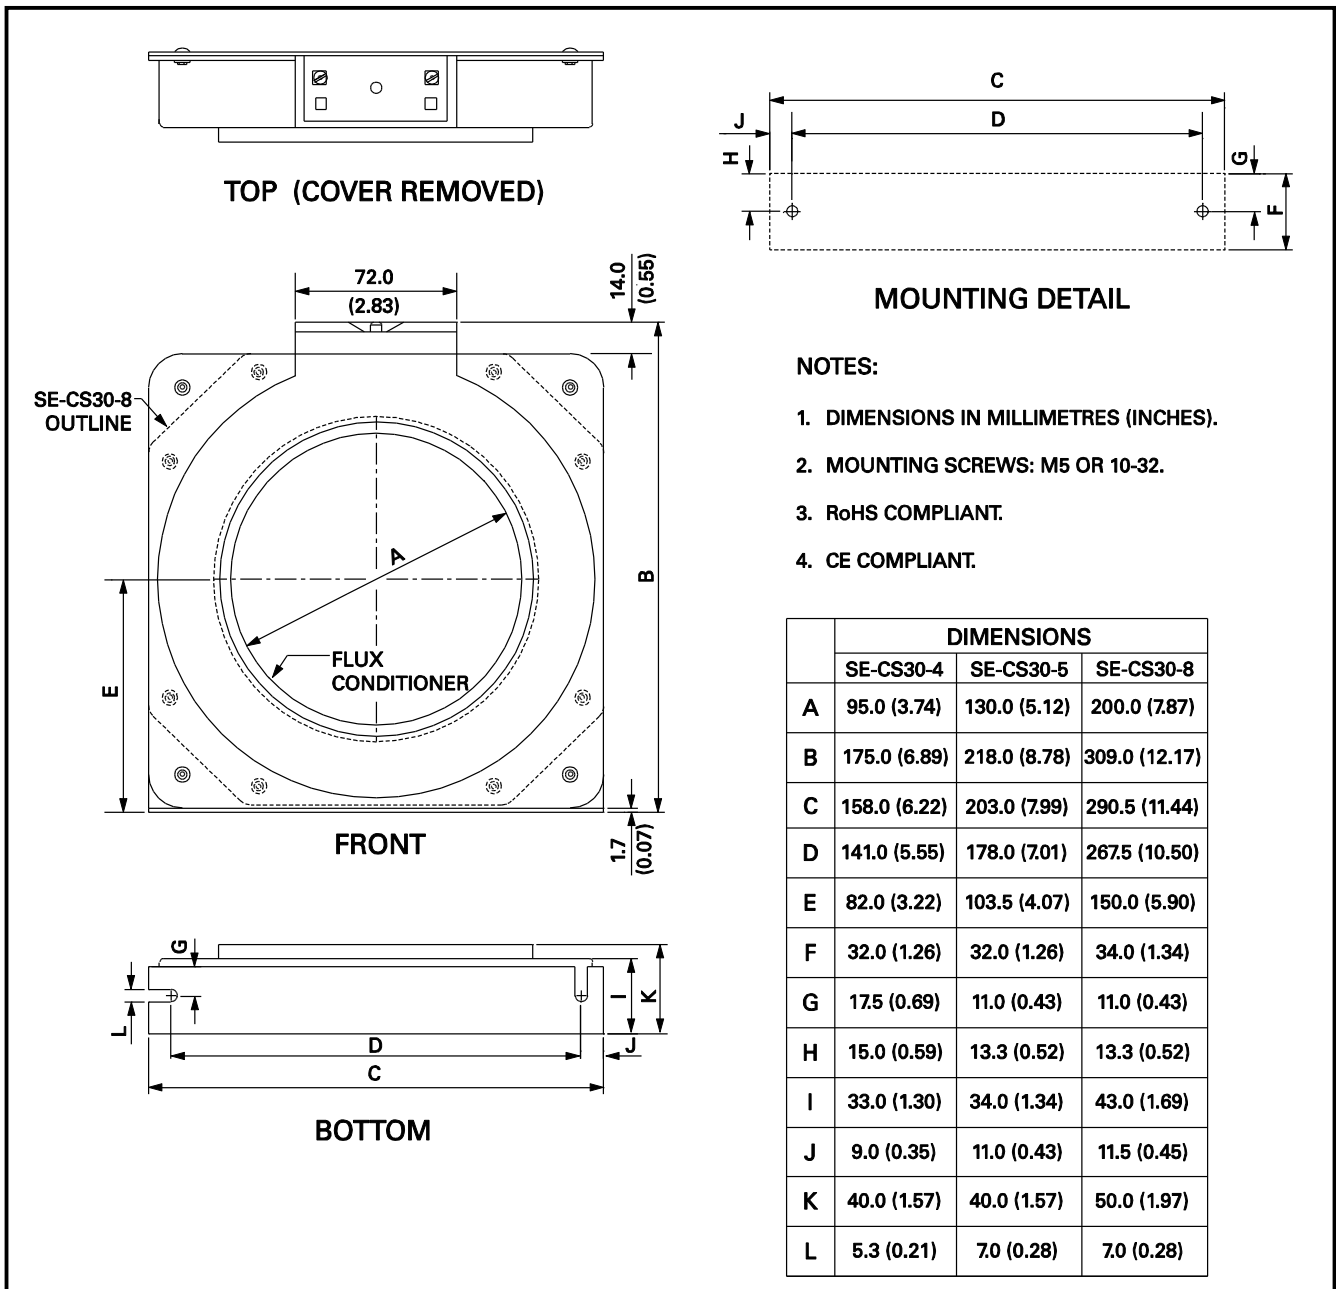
SE-CS30-4, -5, and -8 Outline and Mounting Details.
